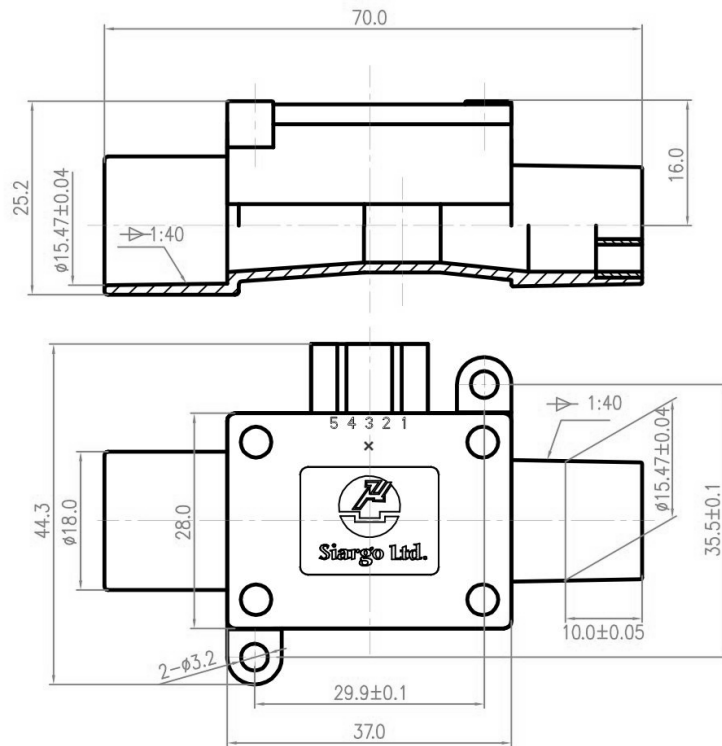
FS1015E mechanical dimensions with ISO15mm connectors.
